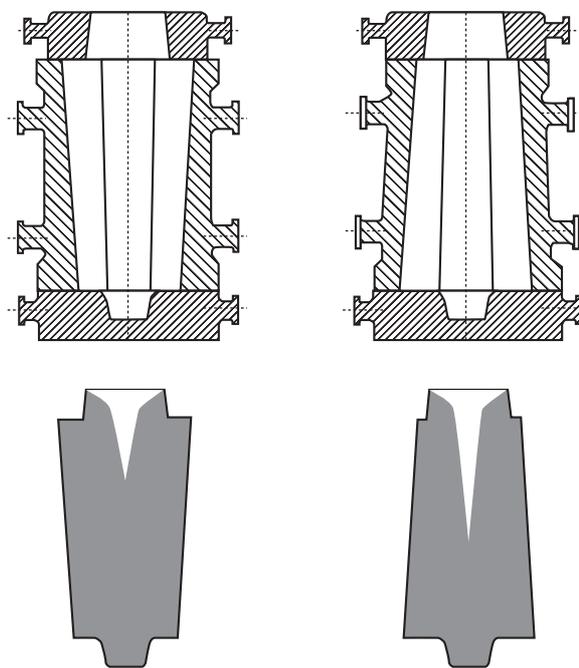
Schematic diagram for the assembling of casting tool and the results of simulating shrinkage defects for cold-tapped ingots.
